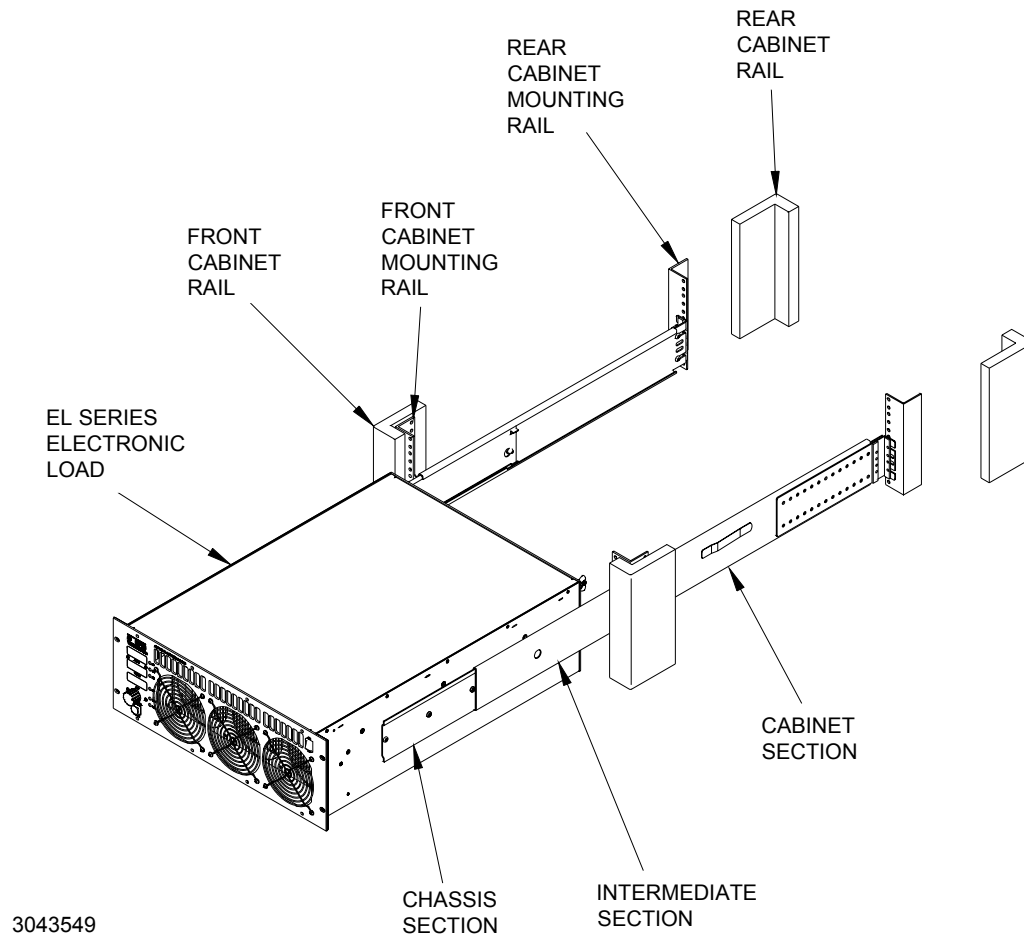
ATTACHING CABINET SECTION TO RAIL
